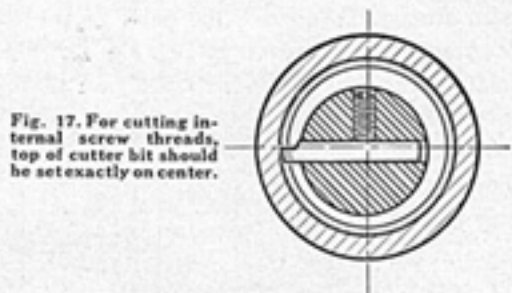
For cutting internal screw threads, top of cutter bit should be set exactly on center.
